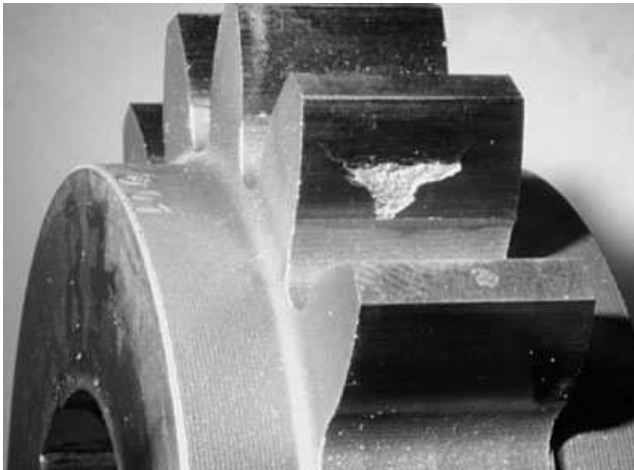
Pitting on a case-hardened toothed wheel (PT-C-type, Pitting Test).
